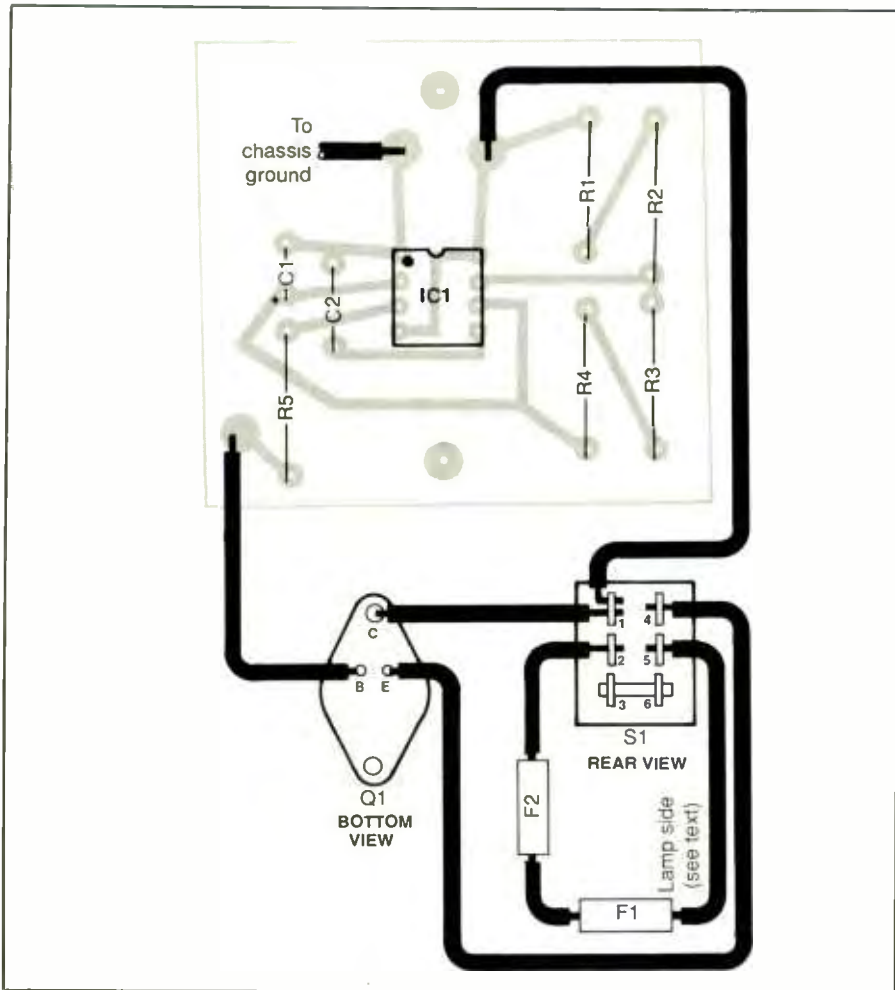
Wiring guide for pc board. The switch, transistor and fuse holders mount off the board and that F1 is actually the headlight fuse holder in your motorcycle's electrical system.
